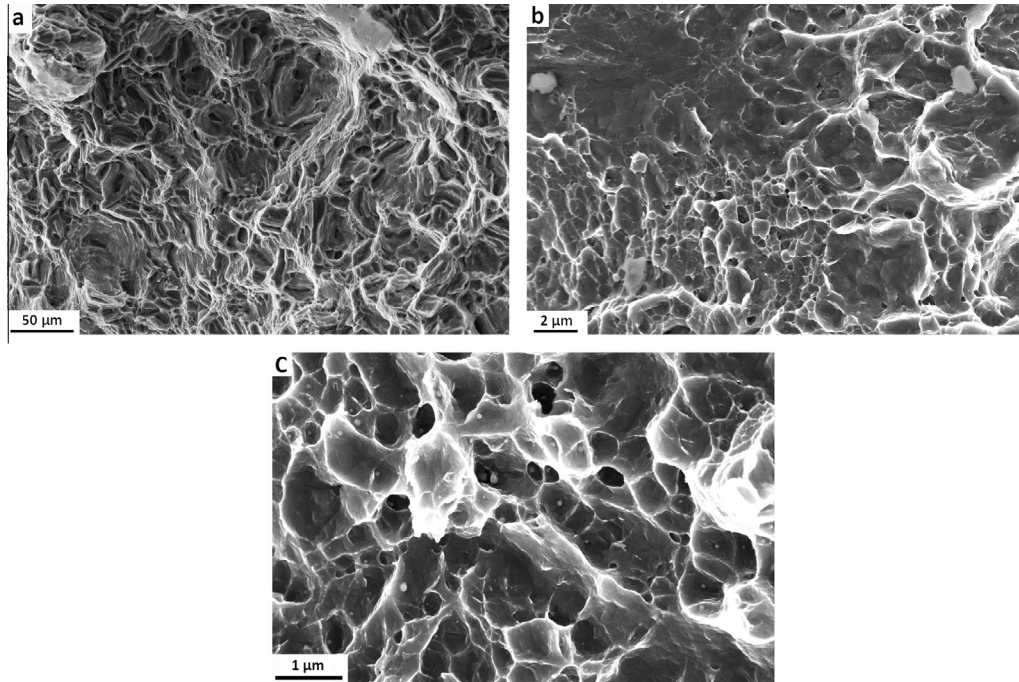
SEM views of the fracture surfaces of tensile broken samples: (a) A0, (b) A4 and (c) B4.
